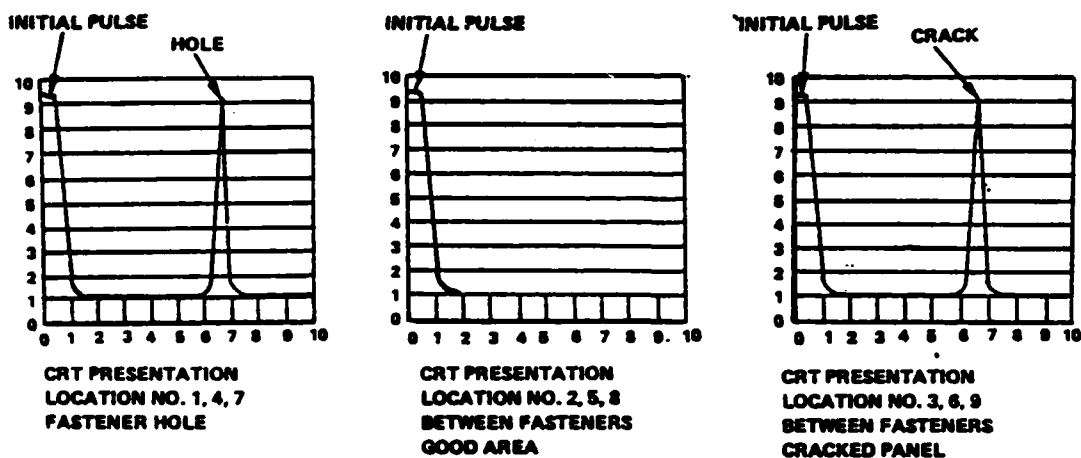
Outer Wing Lower Surface Panels, Fastener Holes Common to Footed Ribs, Engine Drag Fitting and Nacelle Attach Angle, OWS 162 and OWS 197 (Sheet 1 of 2)
